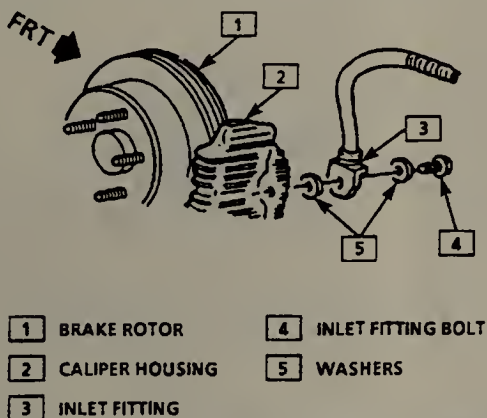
Disconnect and plug the fluid line fitting if the caliper is being overhauled or replaced
